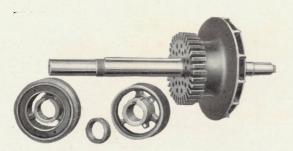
CONSTRUCTION DETAILS OF VENTILATED MOTOR ARMATURE
